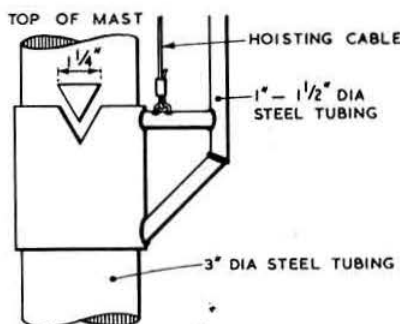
Modification to the key and keyway of the ZE Beam Raiser.
